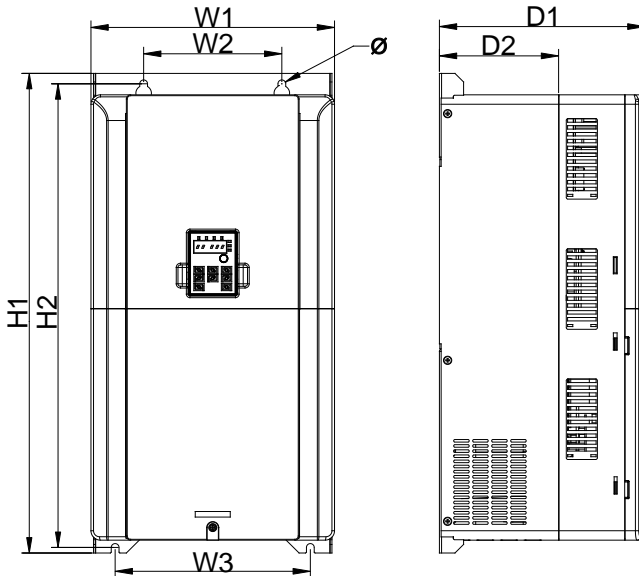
Wall installation diagram for 380V 45kW–55kW VFD models
